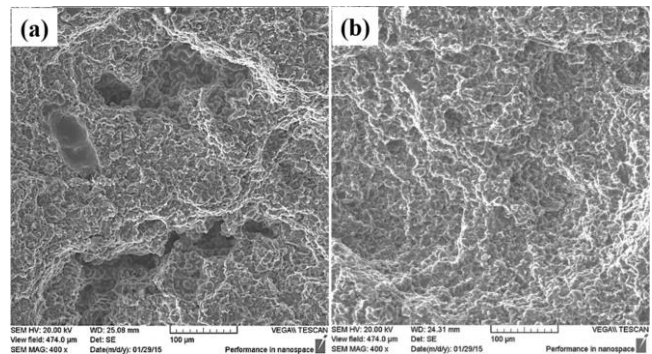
Tensile fracture surfaces of the modified ADC12 alloys; (a) is 0.6% Mg and (b) is 0.8% Mg
